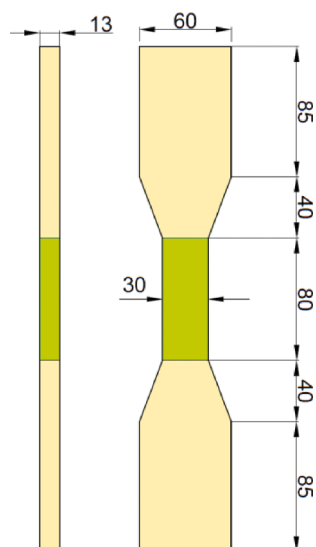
Dogbone-shaped specimen for uniaxial tension test (unit: mm).
